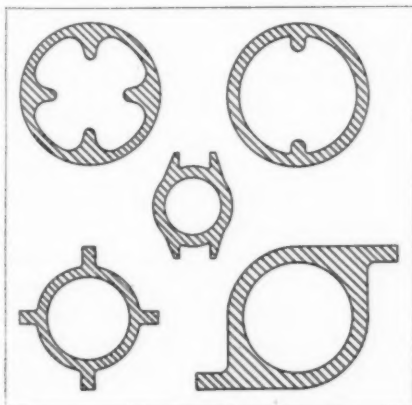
Examples of extruded steel tubes with special inside and outside shapes
